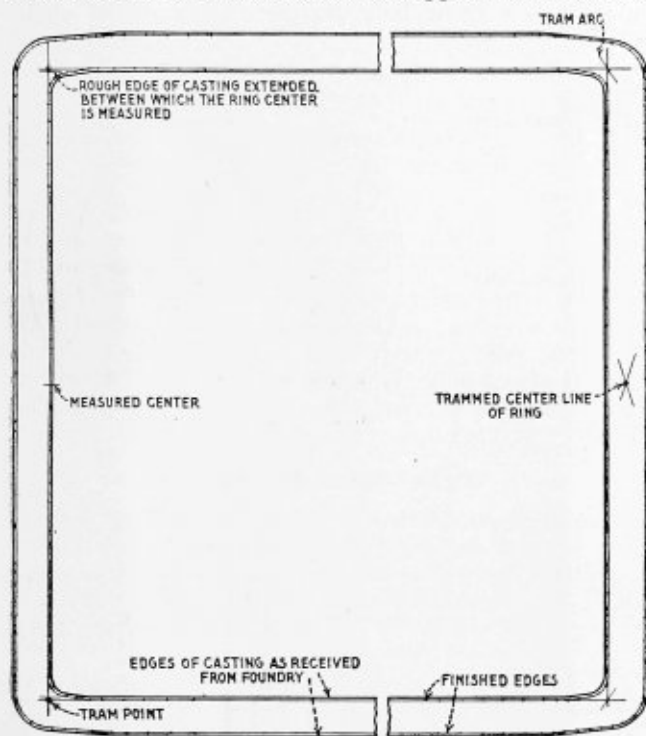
Firebox ring laid out for milling and planing inside and outside edges
